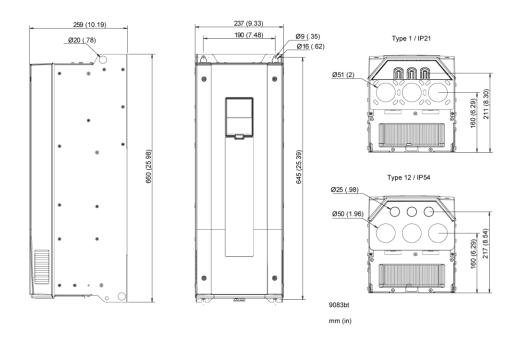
Siemens Drive Dimensions, FS7, Wall-Mount.
